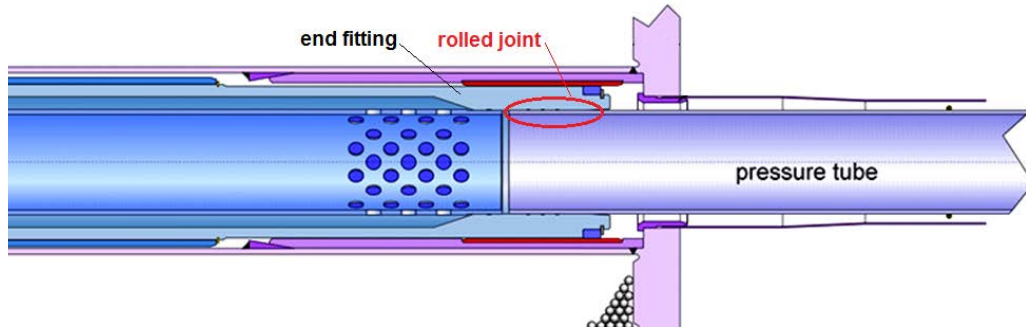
Fuel channel detail showing pressure tube rolled joint
